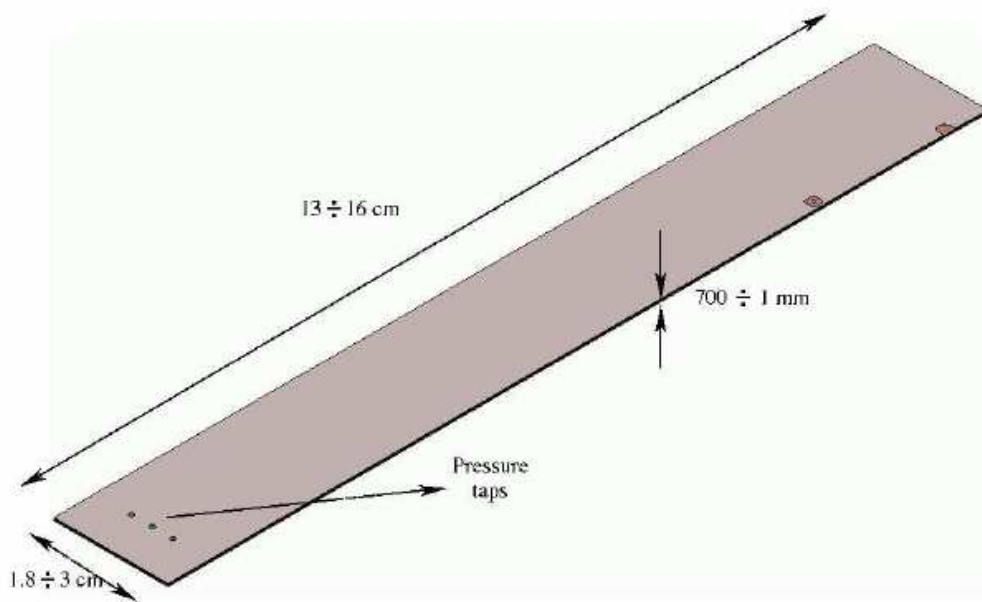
Pressure sensor strip structure: assembled view and dimensions.
